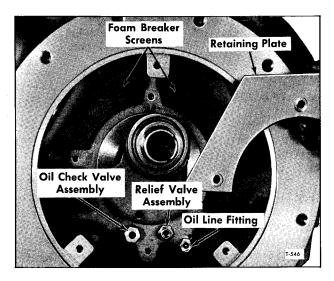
Compressor Foam Breaker Screens, and Valves Installed
